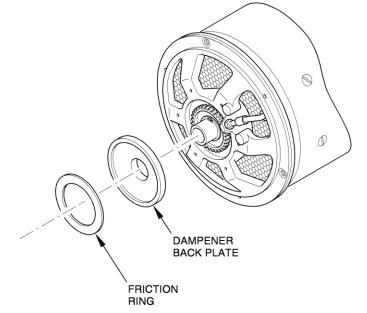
Installing Dampener BackPlate and Friction Ring
